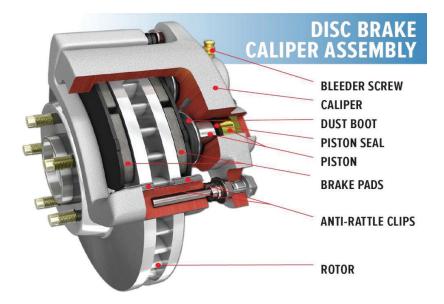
Wheel brake caliper component [GridOto.com (2021) [3], image used for illustrative purposes; all rights belong to the publisher].
